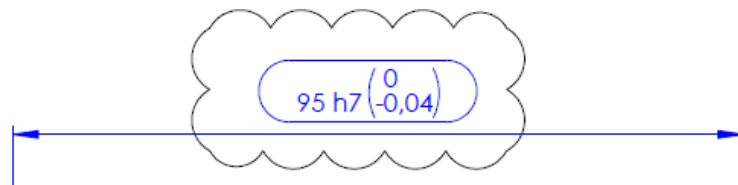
Wall to Wall Dimension and Tolerance specifications for internal subsystems
